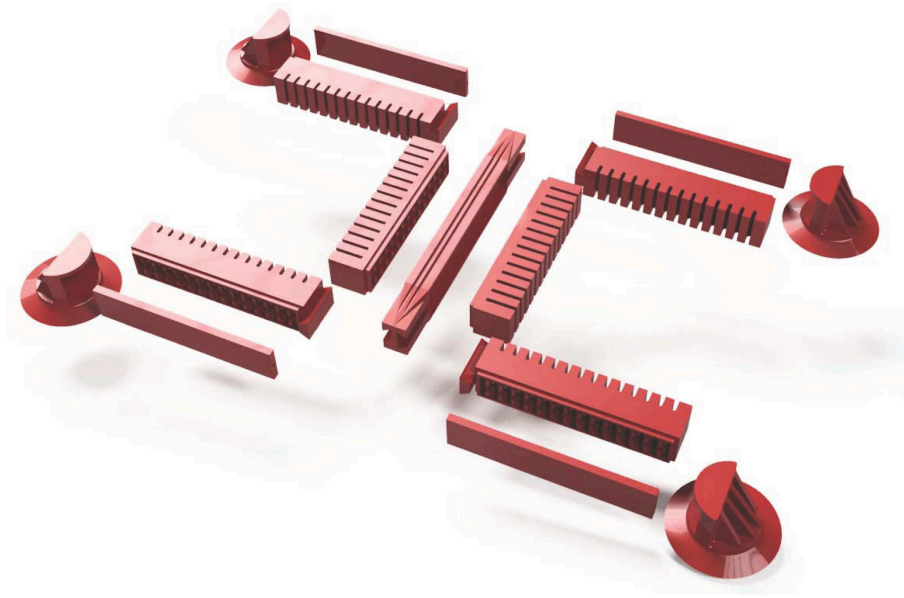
| Explosion view of the small prototype of the gecko-inspired soft robot.
